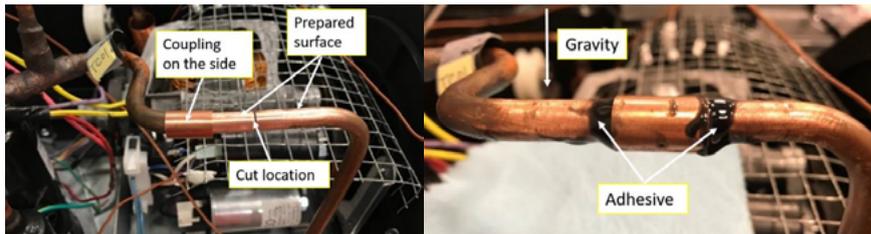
Photographs of the cut location “1” for the tube-to-tube joint after preparing bonding surface (left) and within the coupling in place over the cut after application of the adhesive (right).
